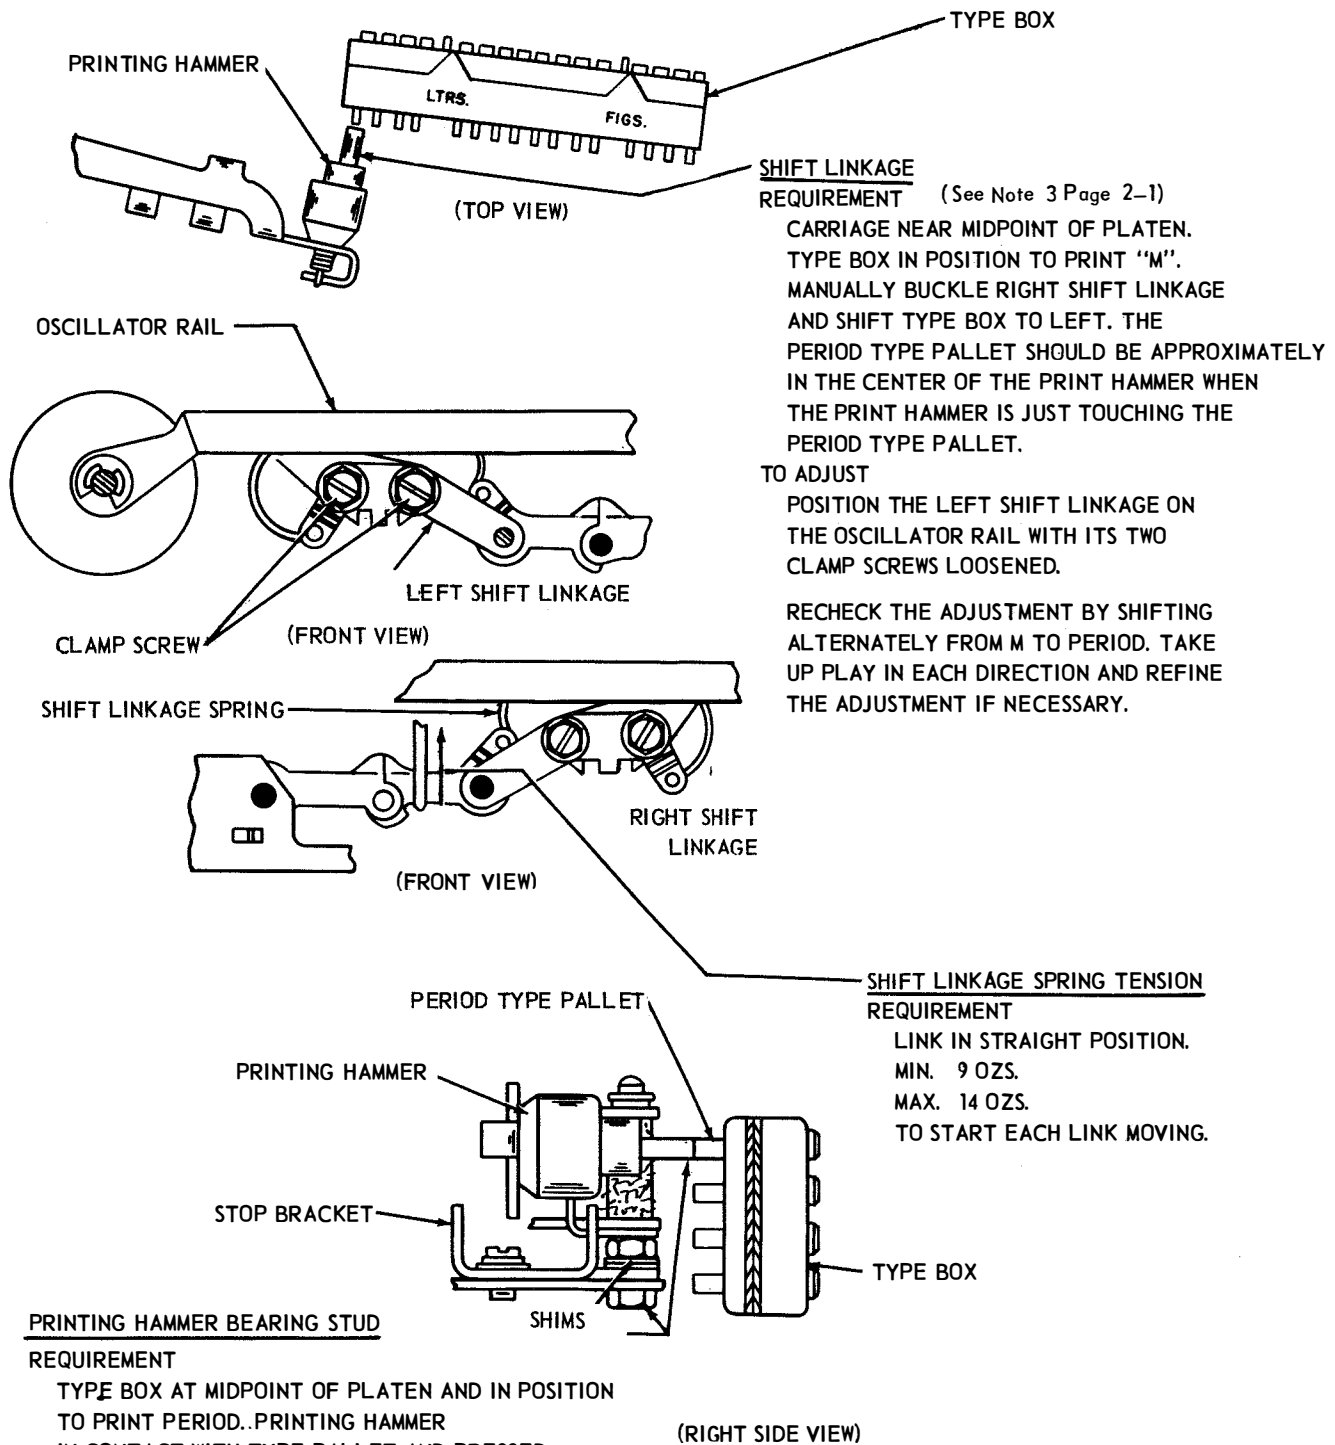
TYPER, PRINTING AND TYPE BOX CARRIAGE
